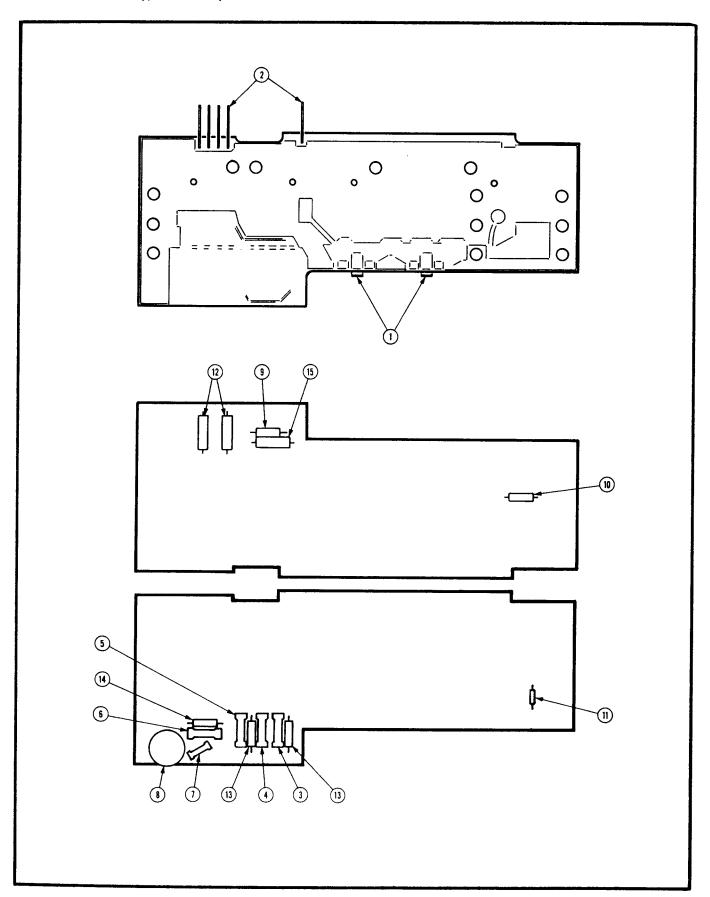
Circuit Board Assembly, Cam Switch, Channel 1 (Sheet 1 of 2).
